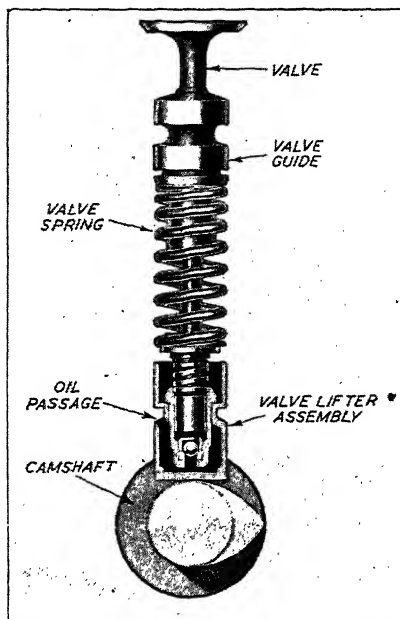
Lincoln-Zephyr Hydraulic Valve Lifter Assembly
